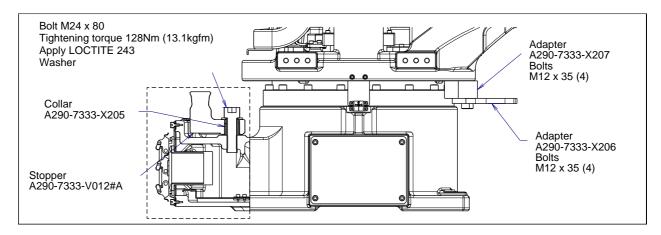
(b) Mounting the J1-axis adjustable mechanical stopper (1/2)
